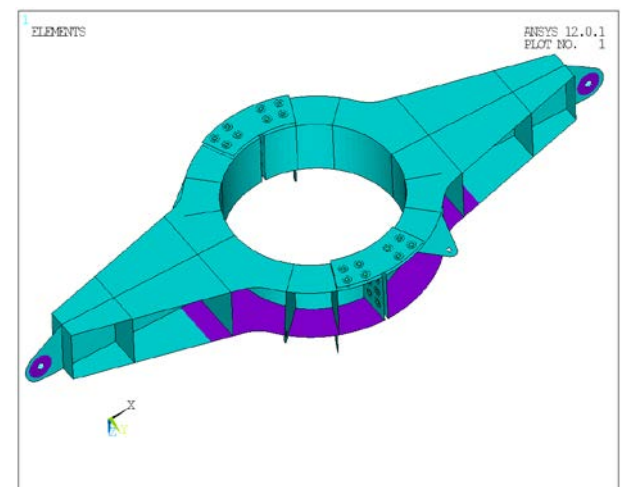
SURFACE MODEL OF THE BOP LIFTING FRAME (VIEW FROM BOTTOM)
